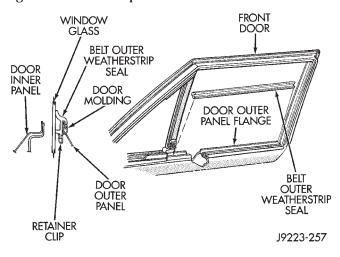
Front Door Belt Outer Weatherstrip Seal
